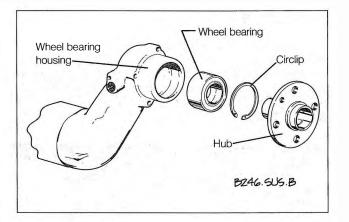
Trailing arm wheel bearing housing, hub, and wheel bearing. Hub is driven out from behind after removing drive axle and outer CV joint. Bearing is pressed out after removing circlip from wheel bearing housing.
